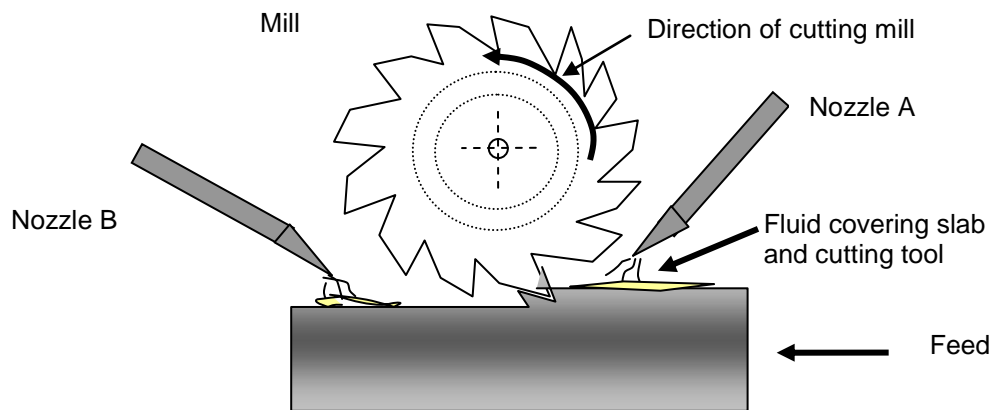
Cutting Fluid Being Supplied To Both Sides Of The Cutter In Slab Milling
